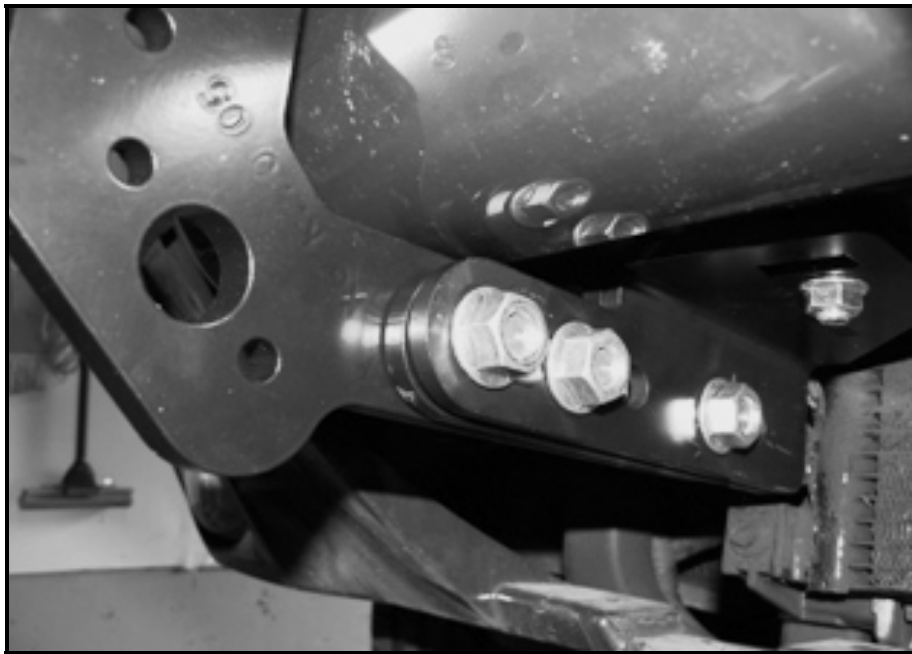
Passenger-side view showing location of bow shackle bracket relative to where the outside and inside mounting brackets meet.
